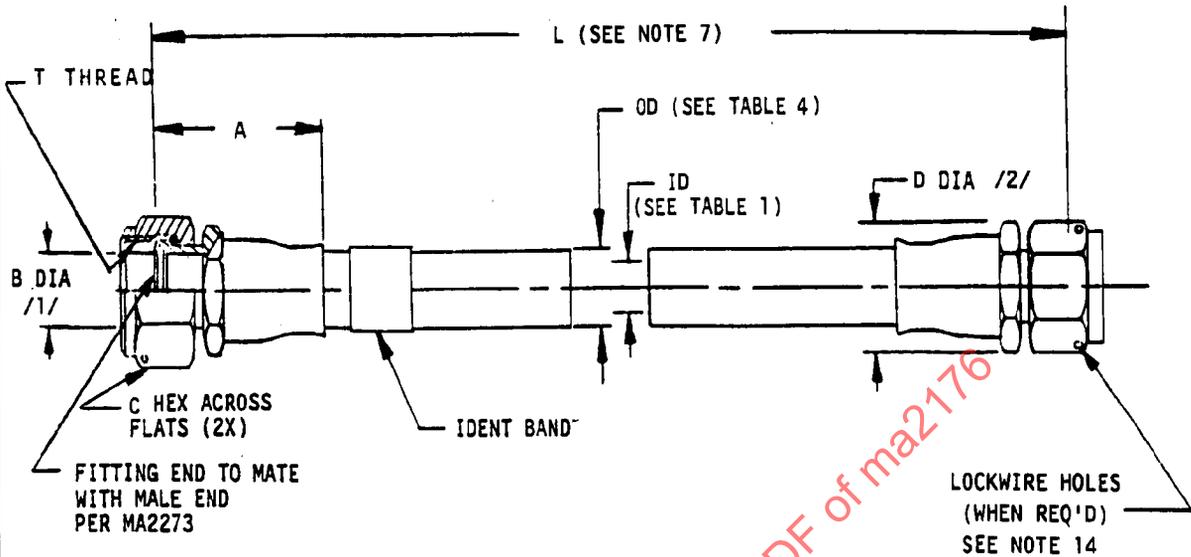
DETAIL OF HOSE ASSEMBLY
